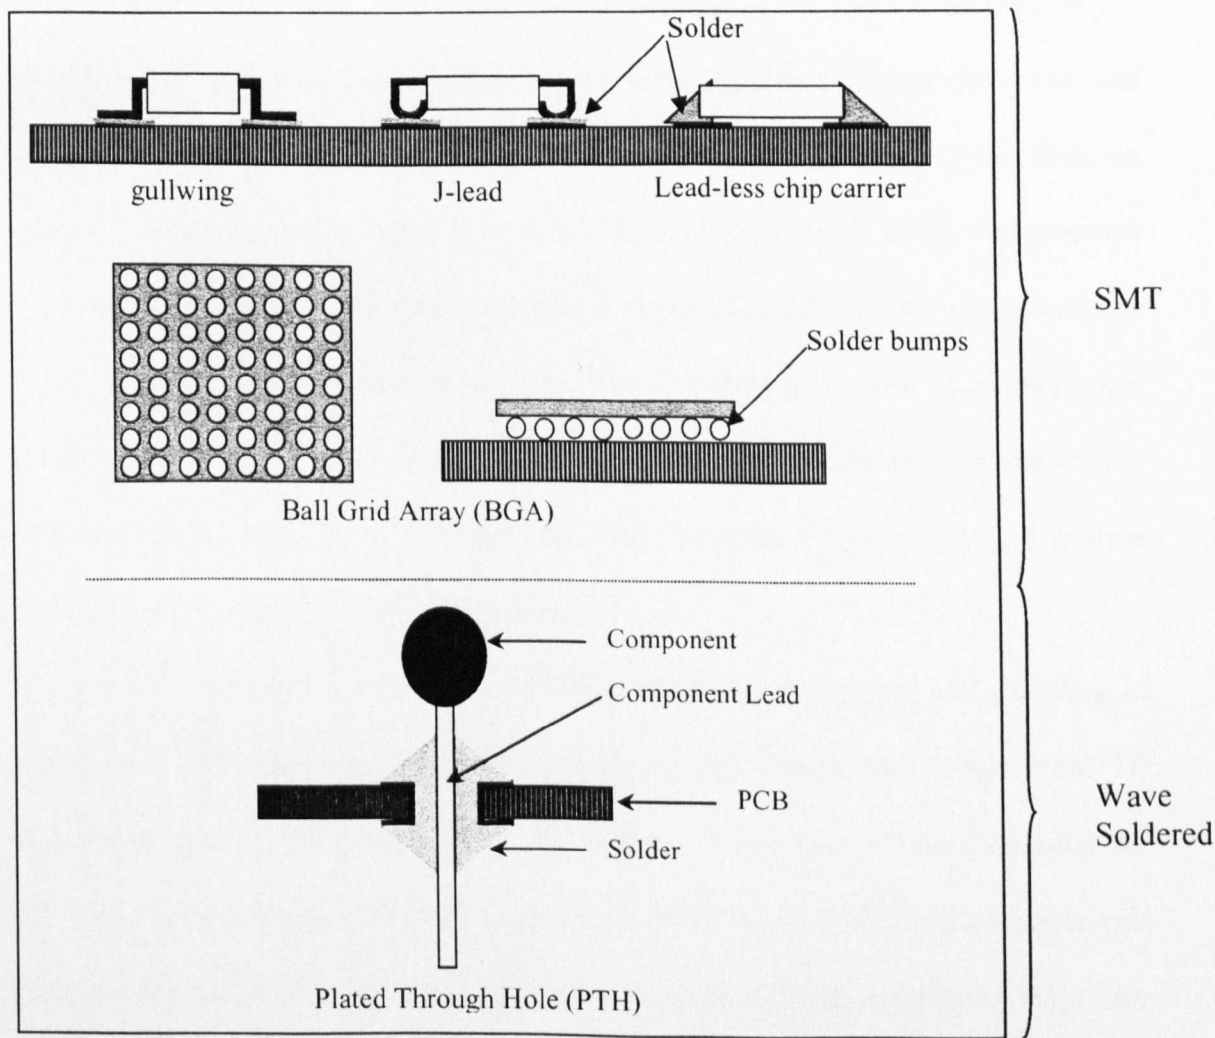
Types of joints formed during the manufacture of electronic equipment
